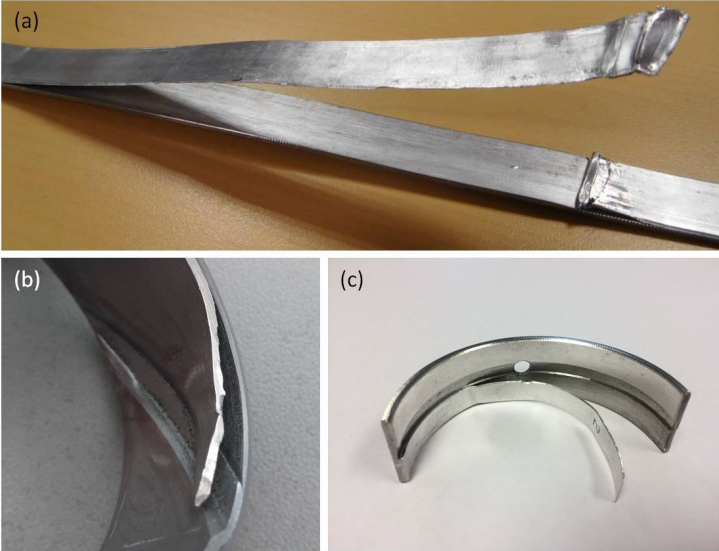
Delamination between intermediate bond foil and steel (a) in a narrow strand, (b) in a half shell bearing after oil groove milling and (c) in a half shell bearing after inner diameter boring
